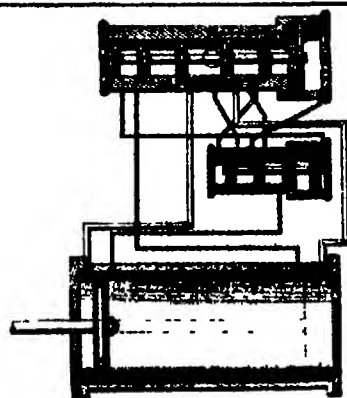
Automatic pressure-operated valve for pump engines, the invention of M. J. Johns
